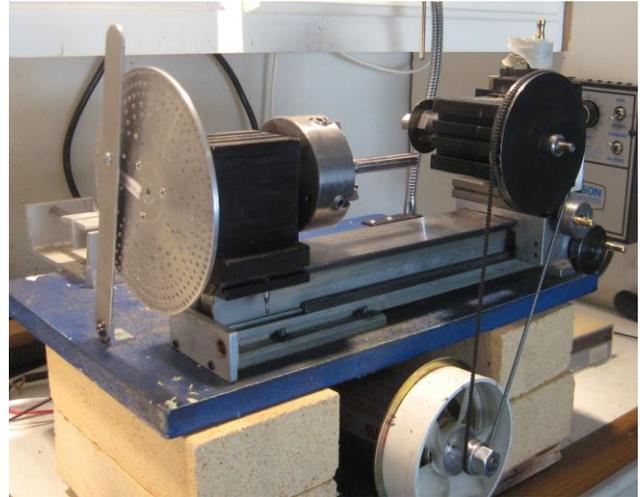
Elevating the Taig lathe on bricks to allow direct drive of the milling spindle. A 4:1 reduction in the belt drive and a variable speed DC motor provides the low speeds and power needed to cut the drill rod without ruining the cutters. The brass rod supporting the end of the pinion stock is not shown in this photo. The variable speed controller is partially visible on the right.
